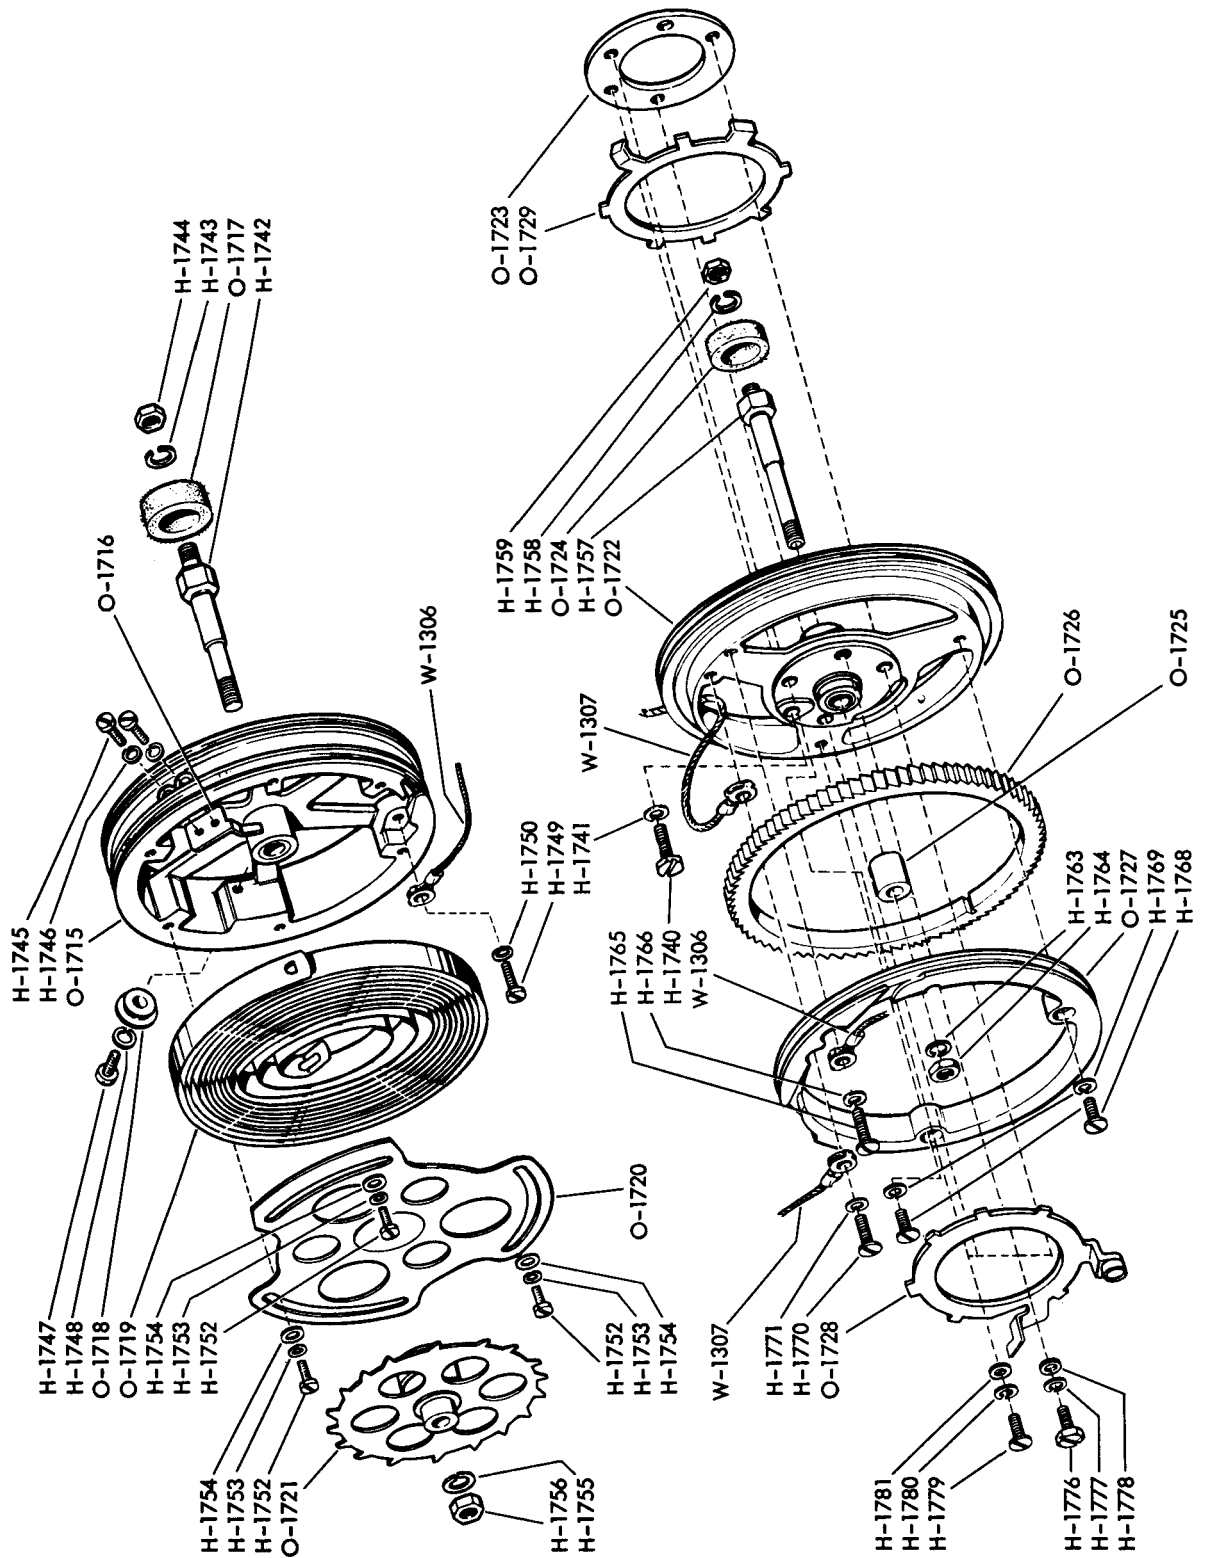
Automatic Typewriter, Spring Drum Mechanism
